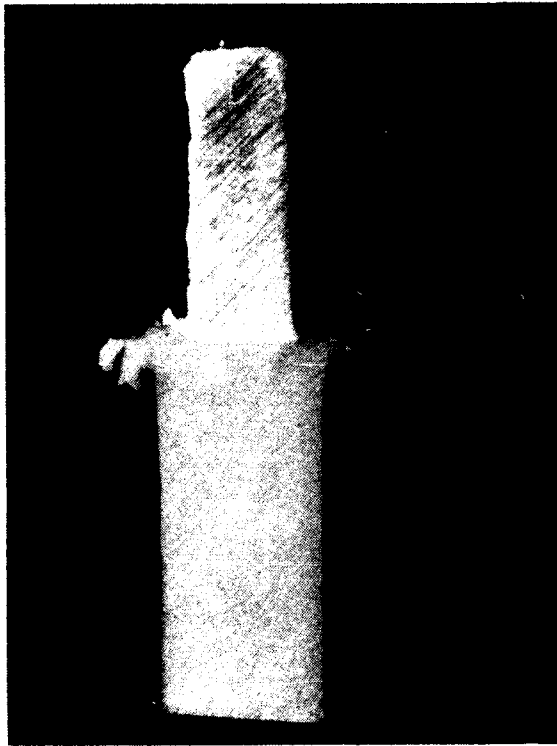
Inertia Welded CVD Re/Nb Joint
